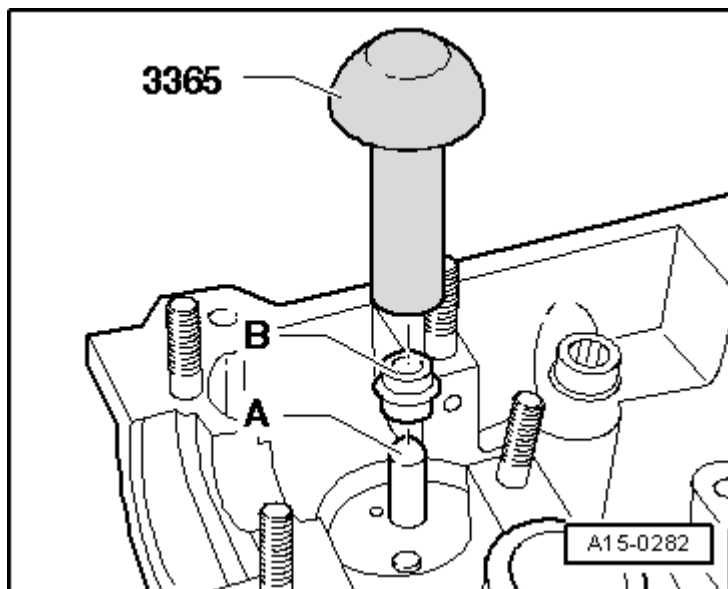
Identifying Plastic Sleeve, New Valve Stem Oil Seals & Valve Stem Seal Driver 3365
